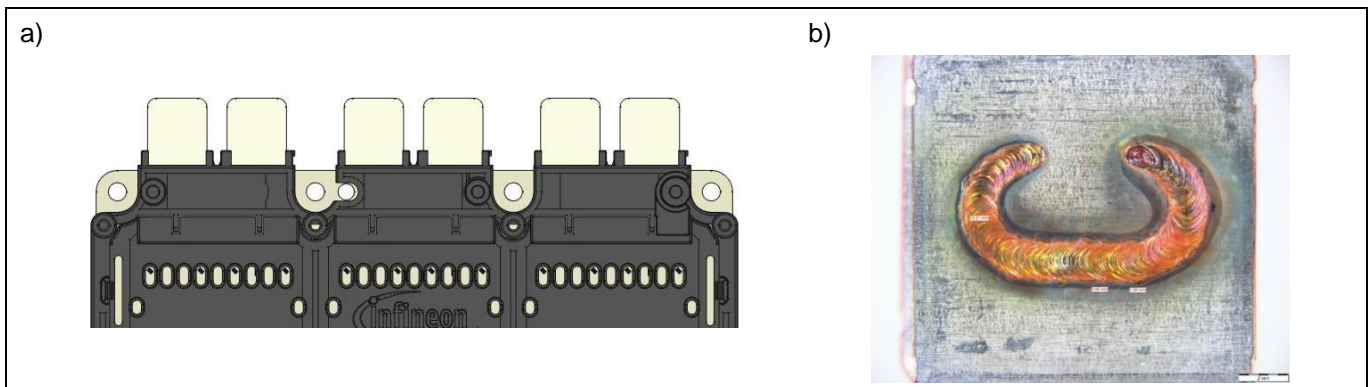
HybridPACK™ Drive power module example without holes at DC Tab side suitable for welding (a). A weld line result on the power tabs (b).
